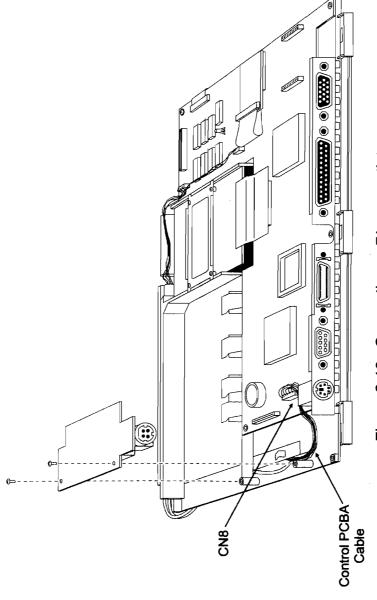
Connecting or Disconnecting the Control PCBA Cable
